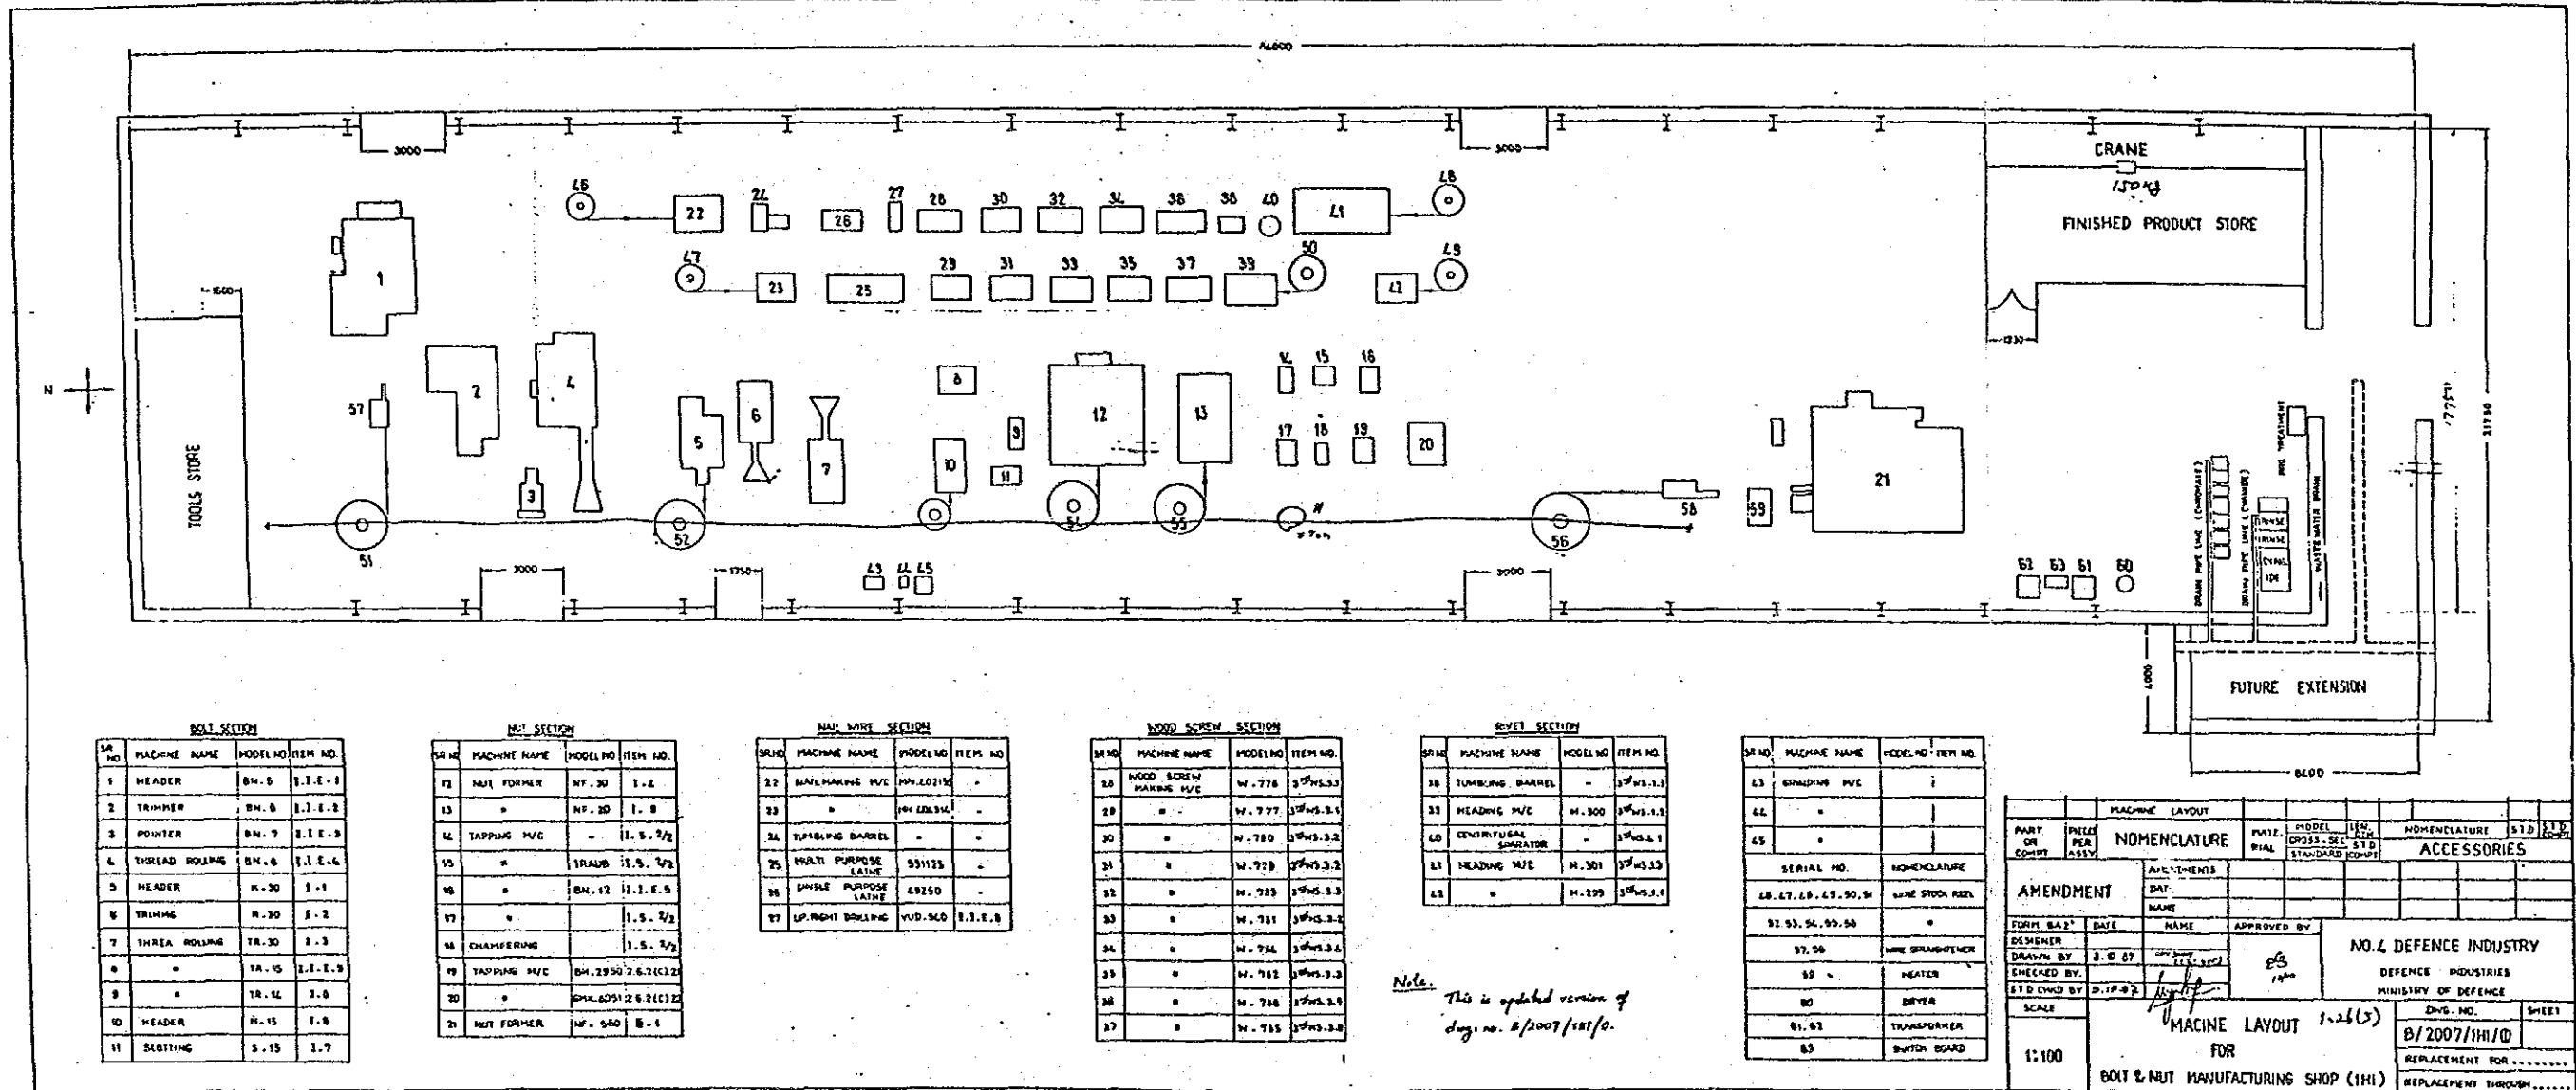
LAYOUT OF BOLT & NUT MANUFACTURING SHOP
